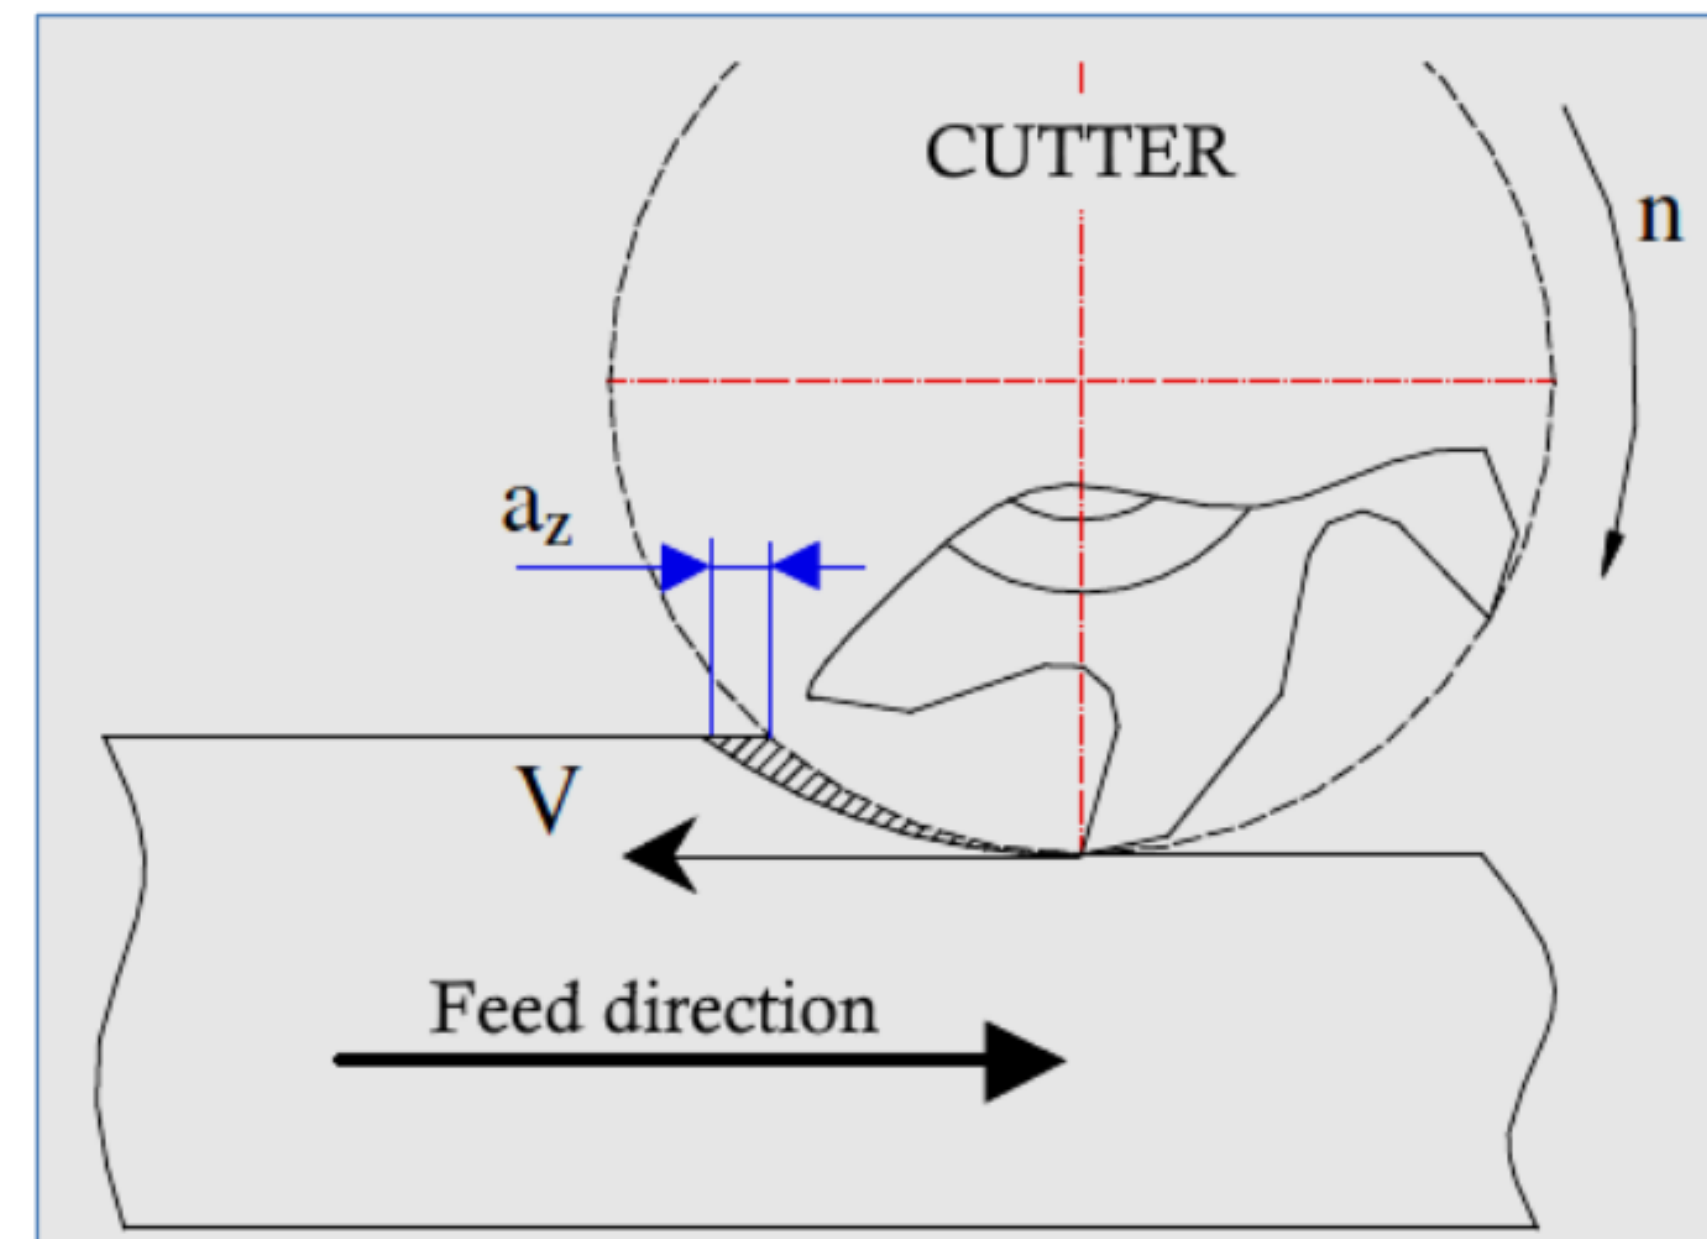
Relative movement between cutter and workpiece with discordant feed direction
